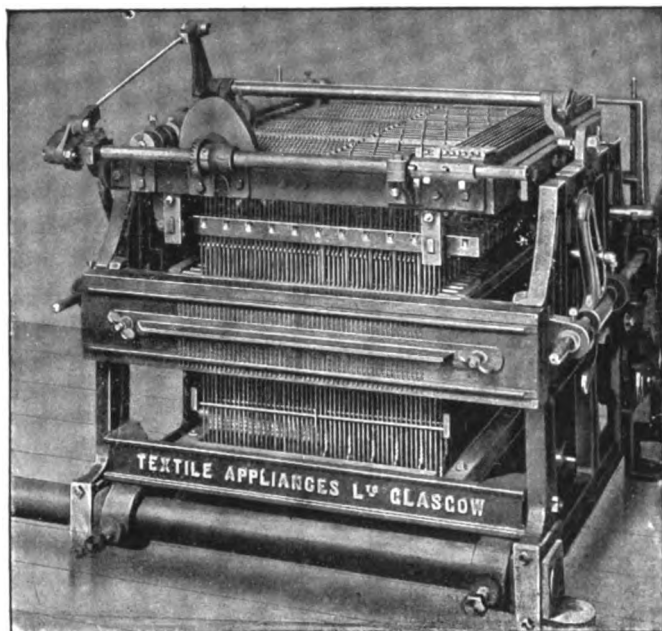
SELF-TWILLING JACQUARD MACHINE.
